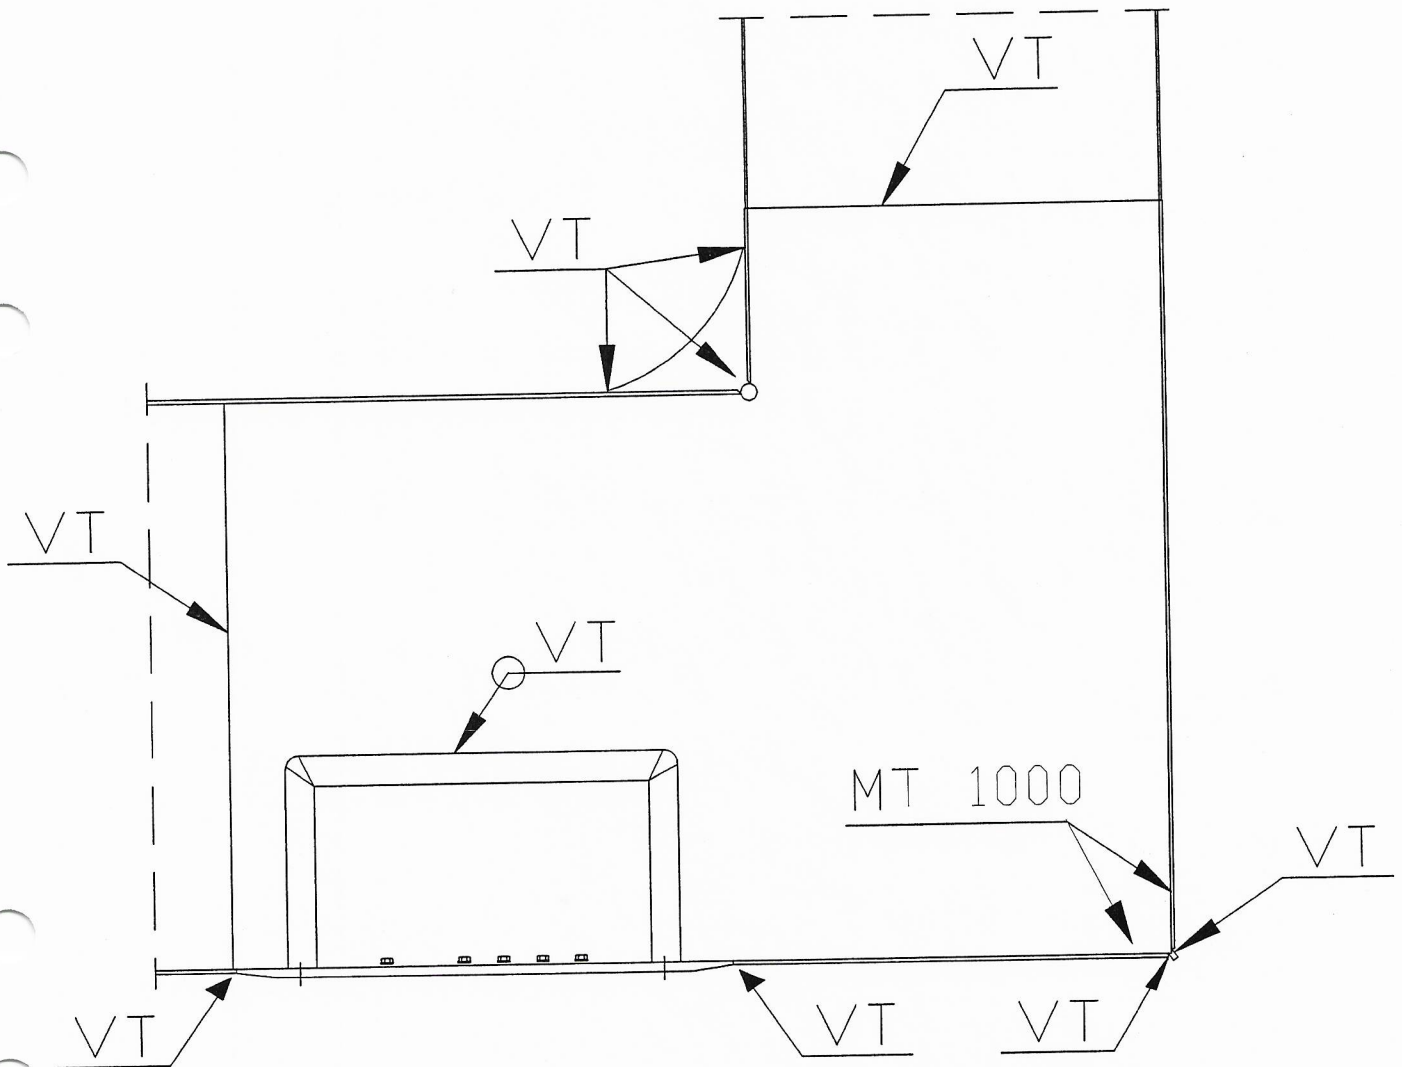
Trolley Rails on the Boom & Main Girder
